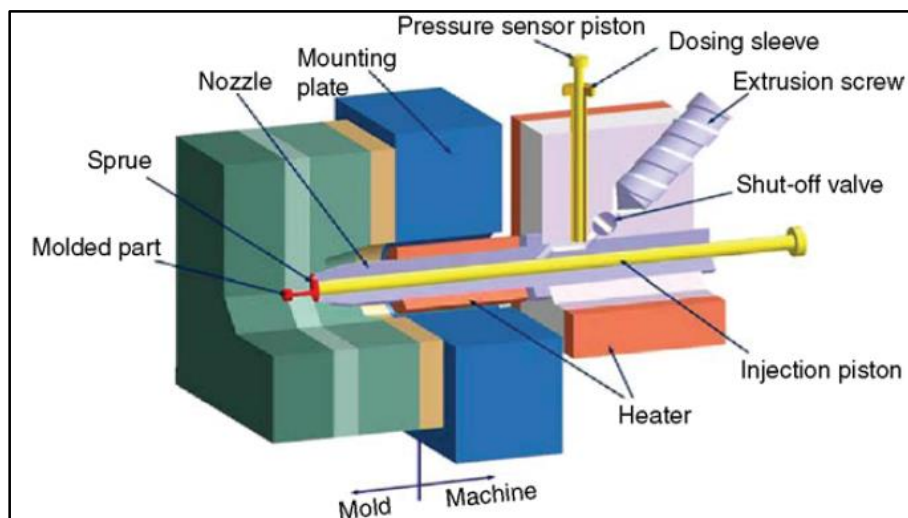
Example of an injection unit for a micro-injection molding machine. [18]
